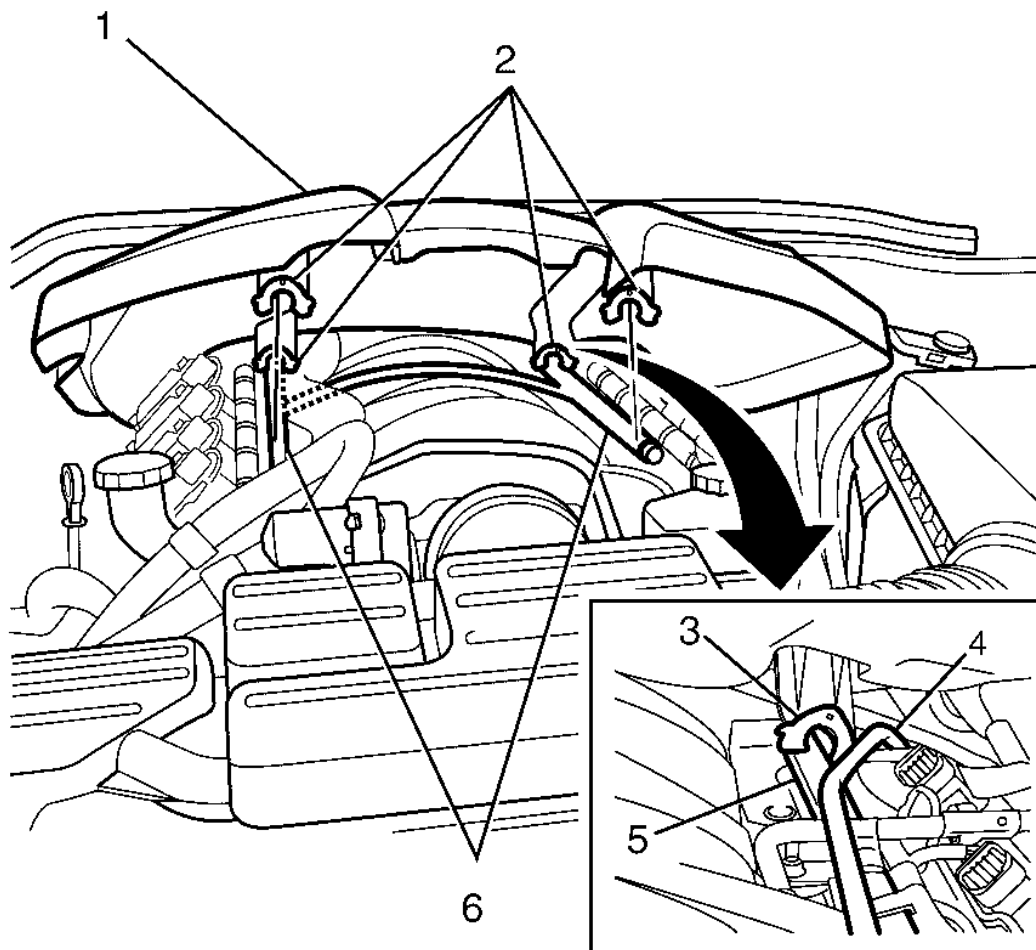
Locating Engine Cover Retainer, PCV Hose & Fuel Rail
